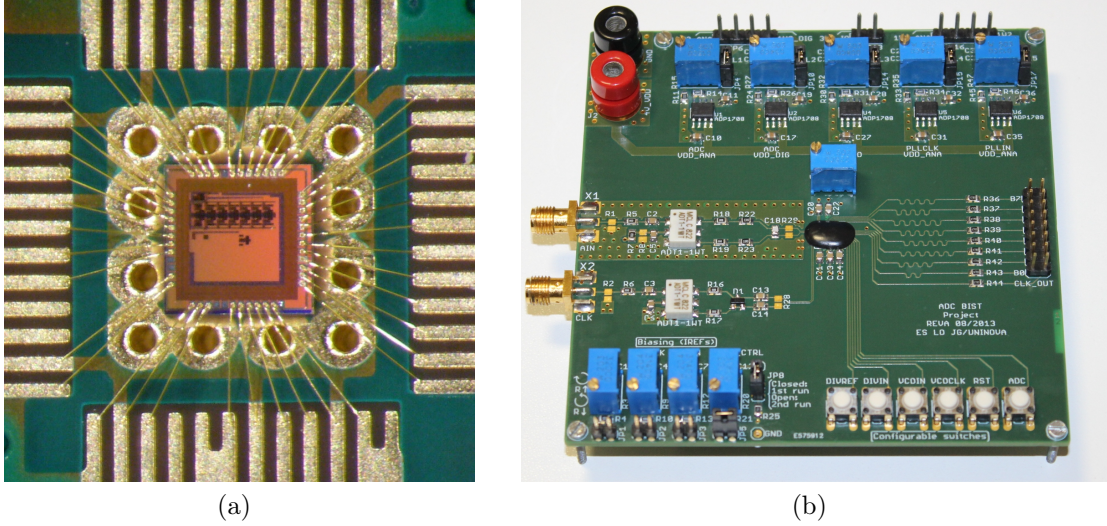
Photograph of a wire bonded die before glob top encapsulation (a) and of a completely assembled test board (b). Die dimensions are $1525\ \mu\text{m} \times 1525\ \mu\text{m}$.
